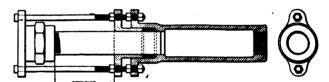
Standard Piping and Water Cooling Connections for Air Compressor Plants. New York
